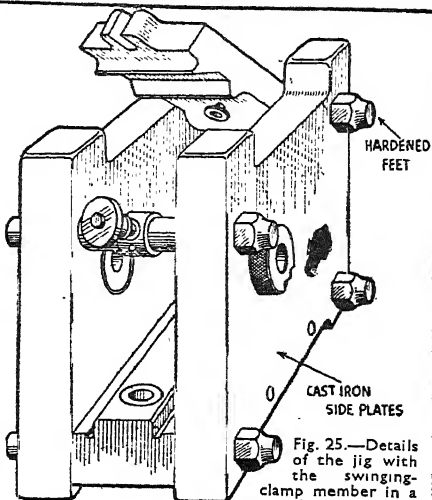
Details of the jig with the swinging-clamp member in a raised position.
